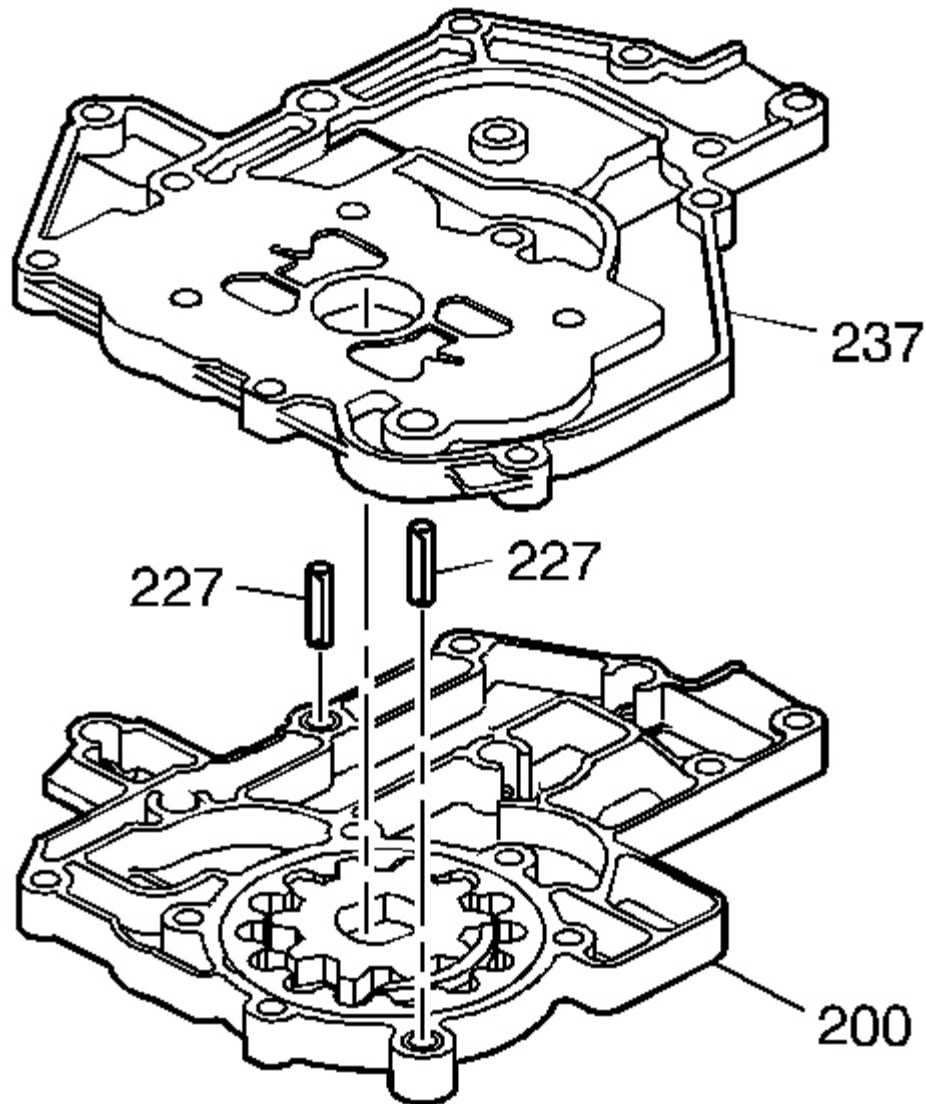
Installing Scavenge Pump Cover Onto Primary Pump Body
